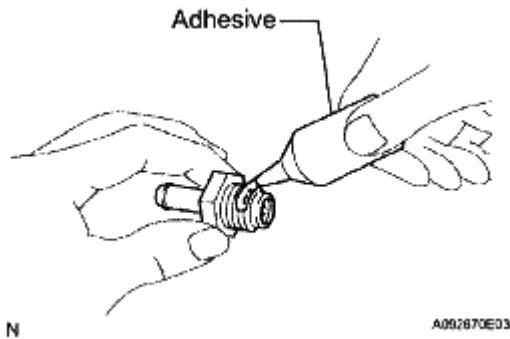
View Of Adhesive To Threads Of Ventilation Valve
